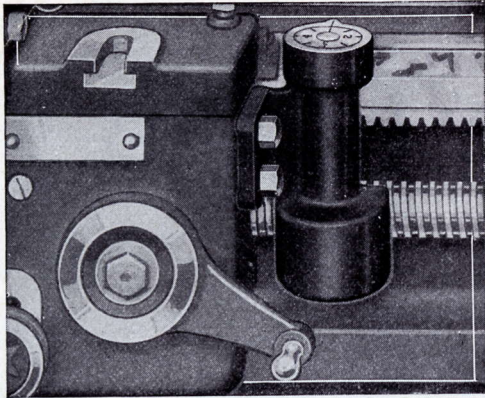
Thread Indicator Fitted to the Carriage of the New Model South Bend Lathe
